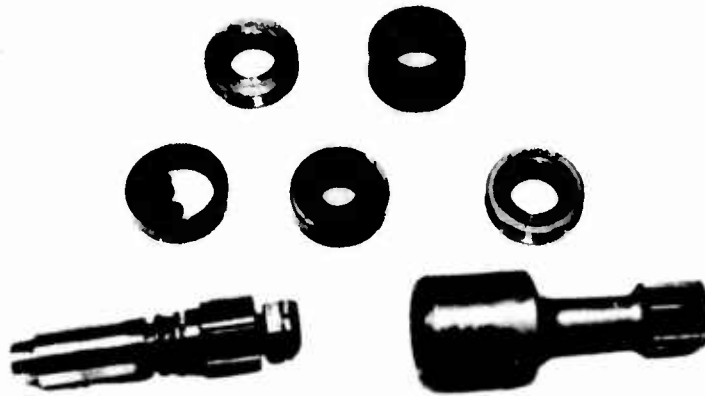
Clutch Components After 137.5-hr of Overrunning at 65,000 rpm (Overrunning Bearing Failure)
